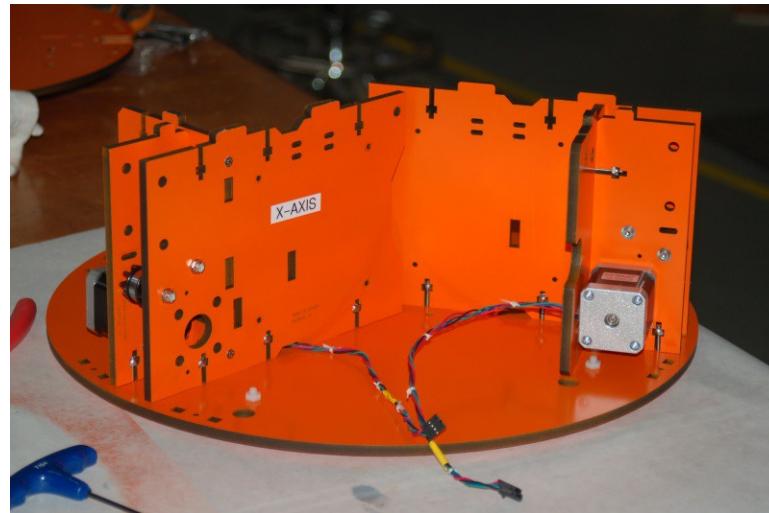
Y Axis Tri-Support and X-Axis stepper wire routing.
